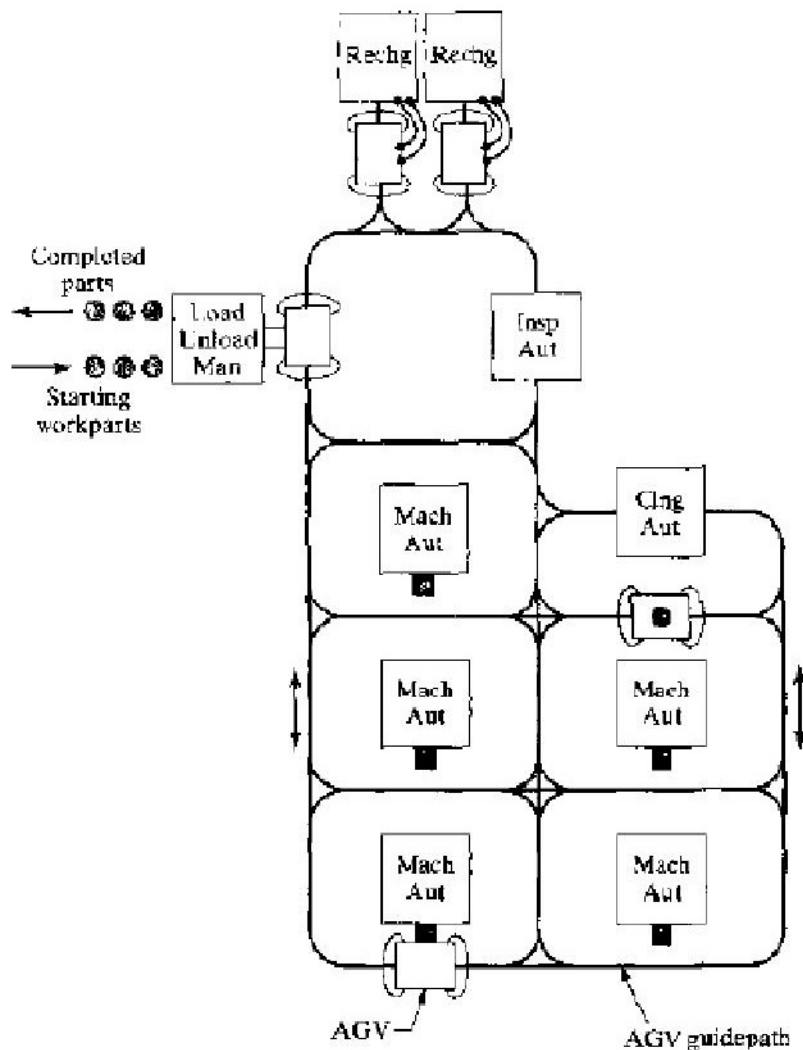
Open field FMS layout. Key: Load = parts loading, UnLd = parts unloading, Mach = machining, Clog = cleaning, Insp = inspection, Man = manual, Aut = automated, AGV = automated guided vehicle. Rechg = battery recharging station for AGVs.
